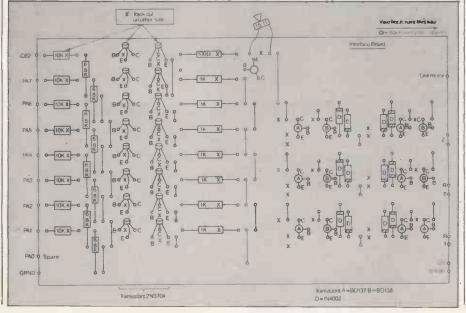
and 5 give a Veroboard layout. When soldering on Veroboard, take care not to make solder whiskers between tracks which is very easily done. It can cause instant destruction of integrated circuits. Connection between Veroboards is accomplished by using 0.1in. pitch PCB edge connectors.
